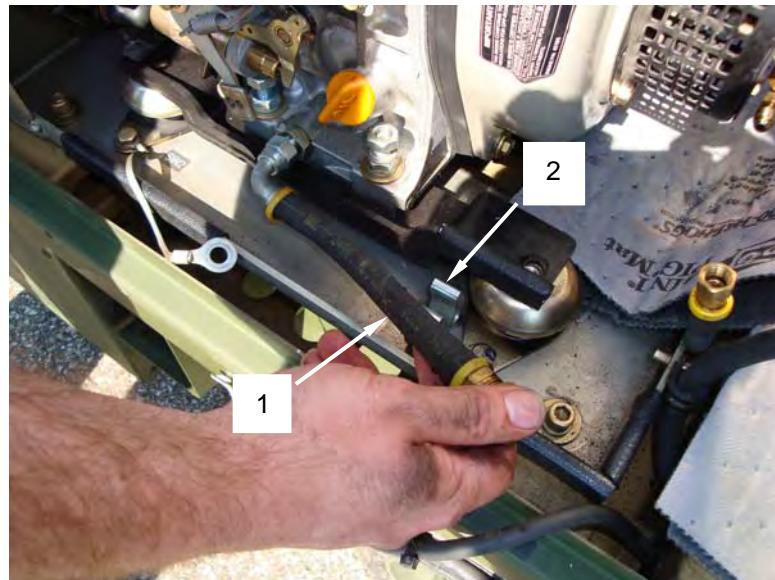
Remove Engine Oil Drain Hose from Spring Clamp.
